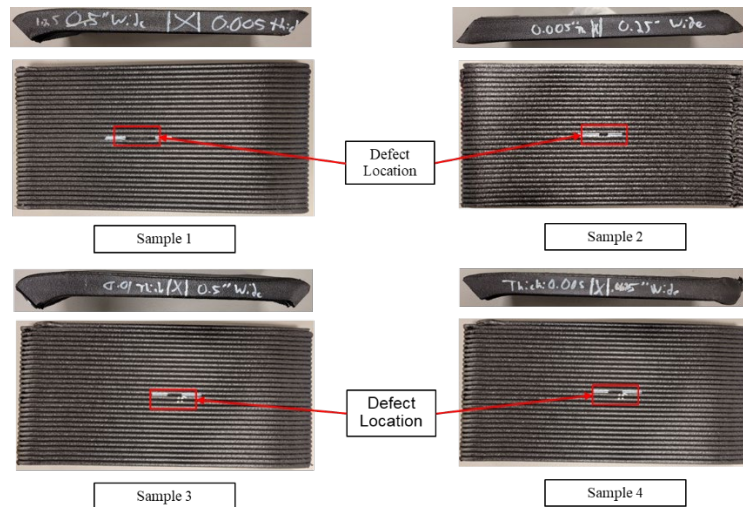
Images of each of the four (4) printed test samples showing the location of defects
